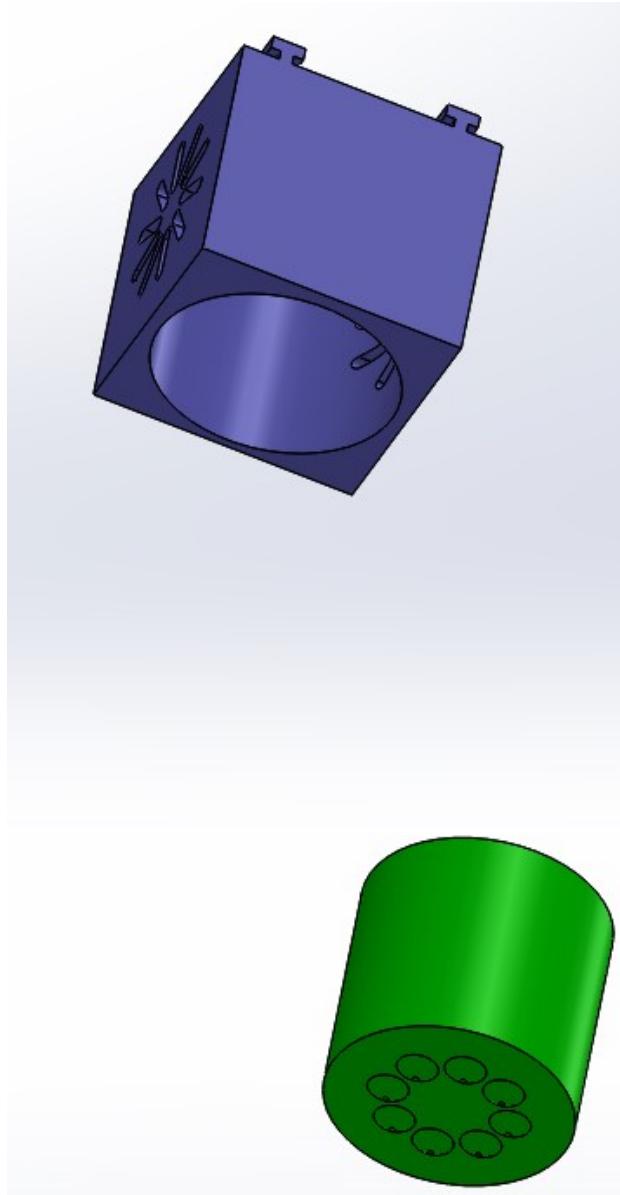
Ferrarer, Auston: Assembly Step 1
